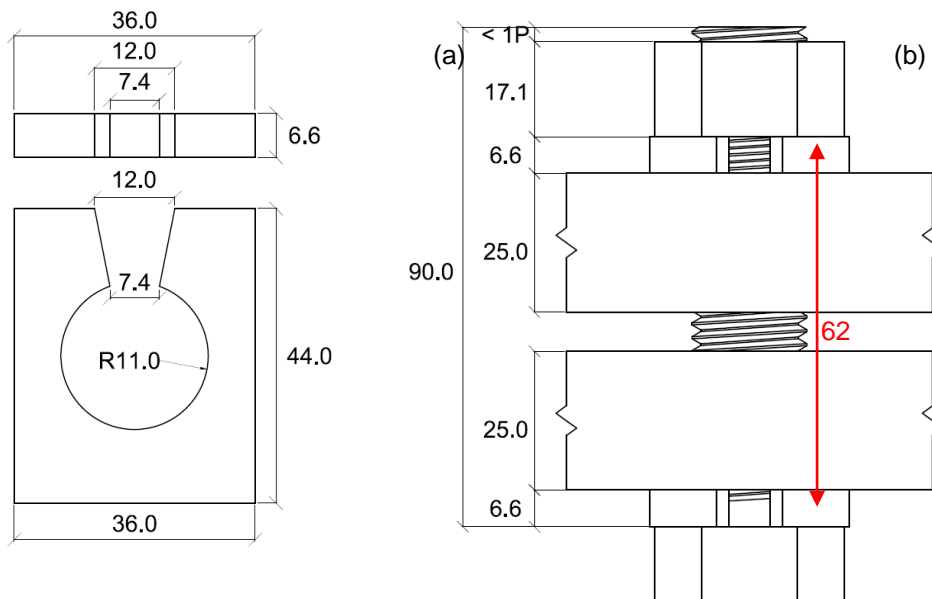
(a) Spacers to enable visibility of gauge length and (b) bolt assembly test setup using these spacers
